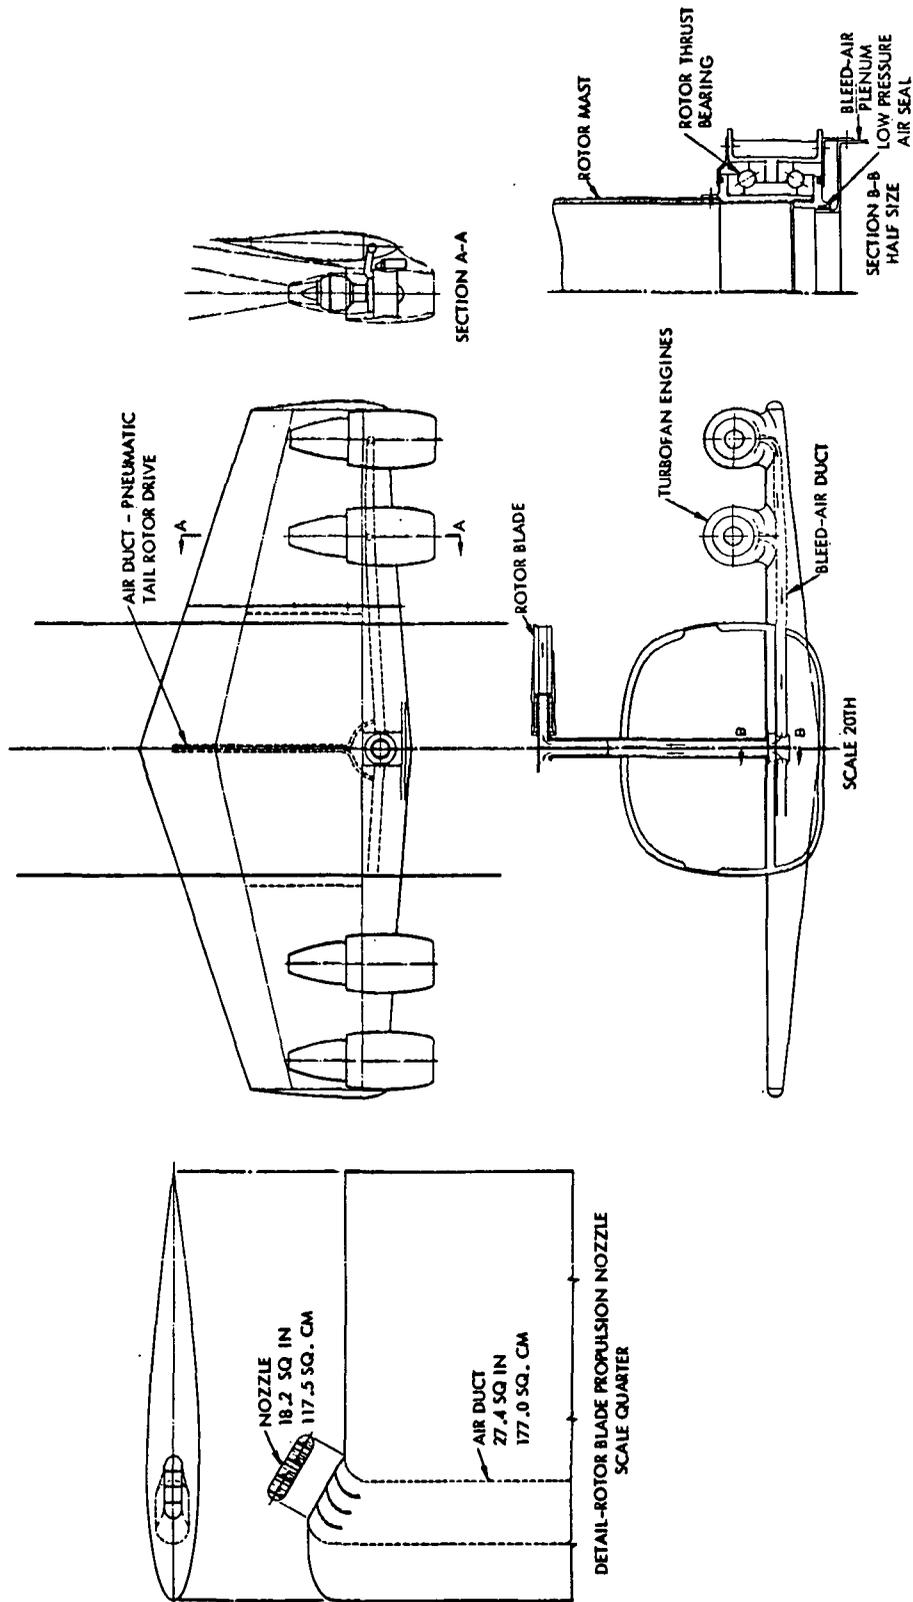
1985 Compound Helicopter Pneumatic Rotor Drive System
